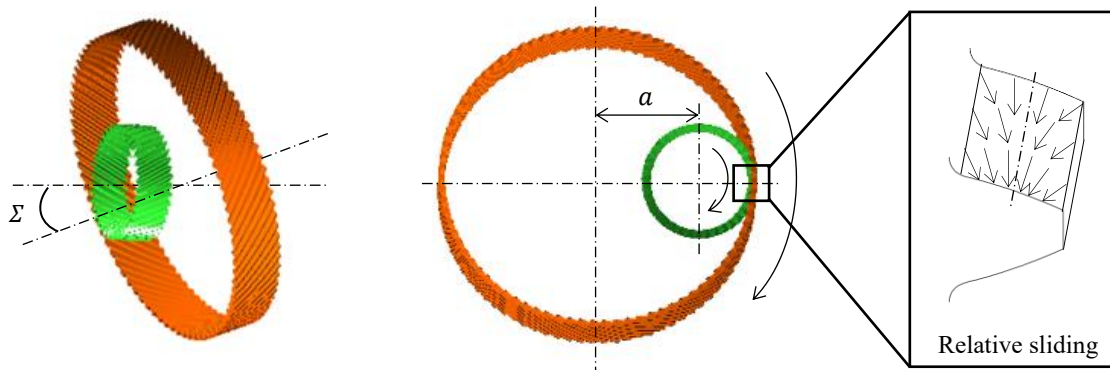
Positional relationship between internal gear honing tool and target gear. The yellow-green shows target gear and the brown indicates honing wheel that has internal teeth. A shaft angle  $\Sigma$  and a center distance is indicated as notation  $a$ . When the rotational direction of target gear and honing wheel is clockwise, the relative sliding velocity vector of target gear during the honing is denoted by arrows in the figure.
